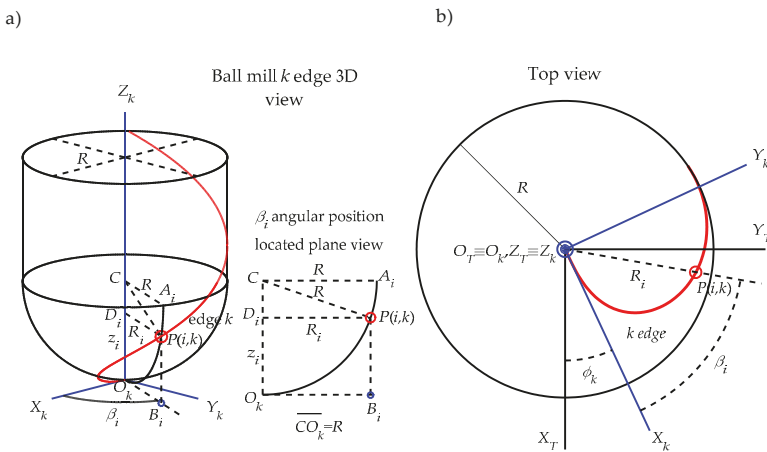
Ball end mill geometry (a) and k edge geometry definition (b).
